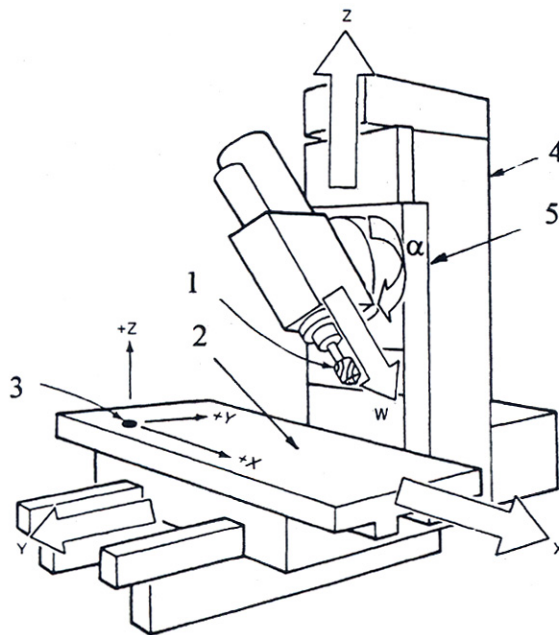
Five-axis vertical spindle machining center. 1- cutting tool, 2 - table, 3 - machine zero point, 4 - column, 5 - head.
